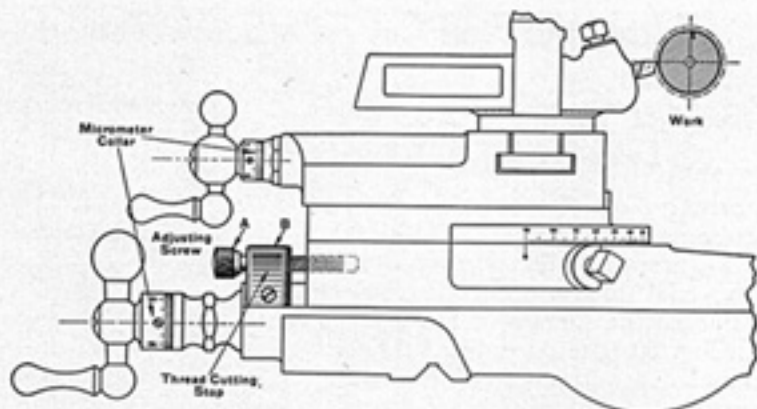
Thread cutting stop attached to dovetail of saddle.
